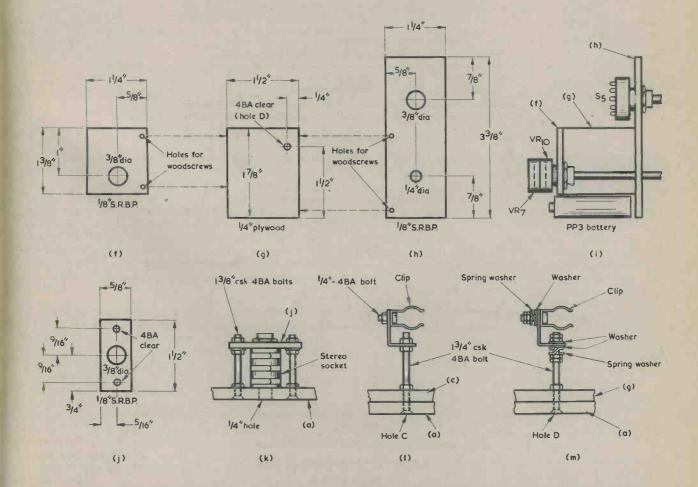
(f) (g) (h) (i). A similar form of mounting assembly is employed for the dual potentiometer VR7/VR10 and S5
